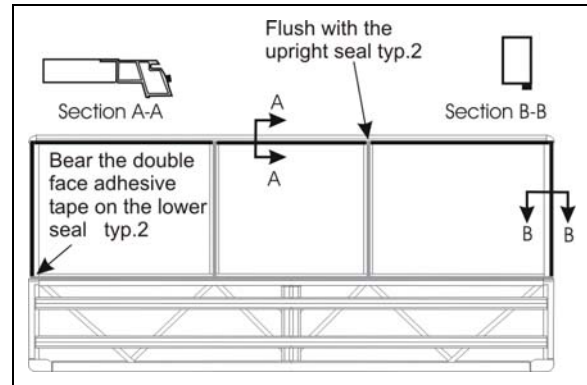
FACE FIXED WINDOWS – 3/16 X 1/2 DOUBLE FACE ADHESIVE TAPE INSTALLATION
